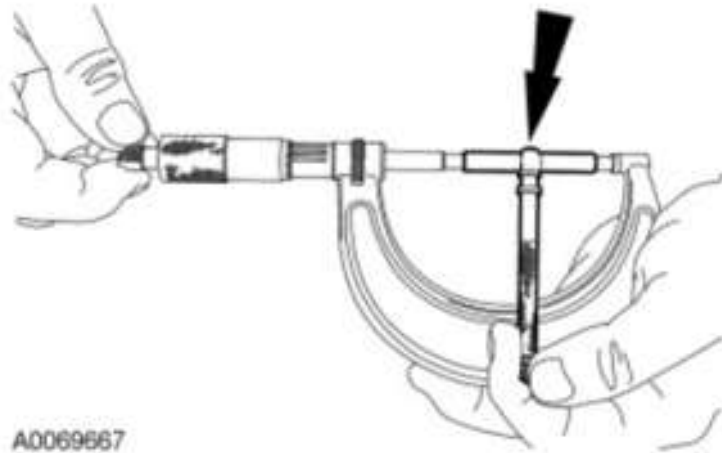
Measuring Camshaft Bushing Inside Diameter With Bushings Installed In Crankcase
